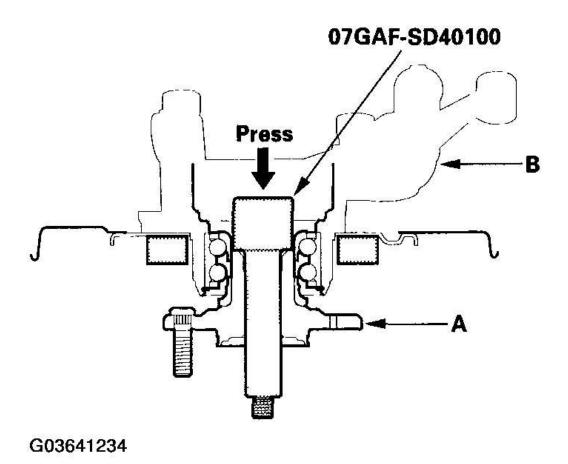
Separating Hub From Knuckle Using Special Tool And A Hydraulic Press Courtesy of AMERICAN HONDA MOTOR CO., INC.
